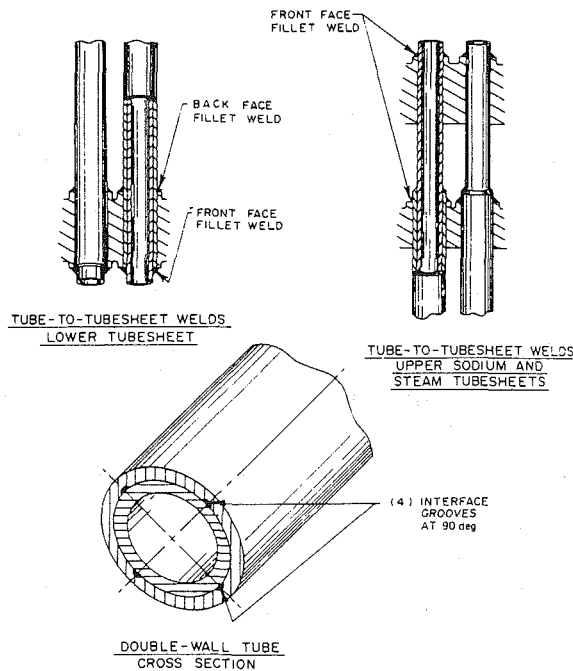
Double-wall tube and tube-to-tubesheet weld locations
